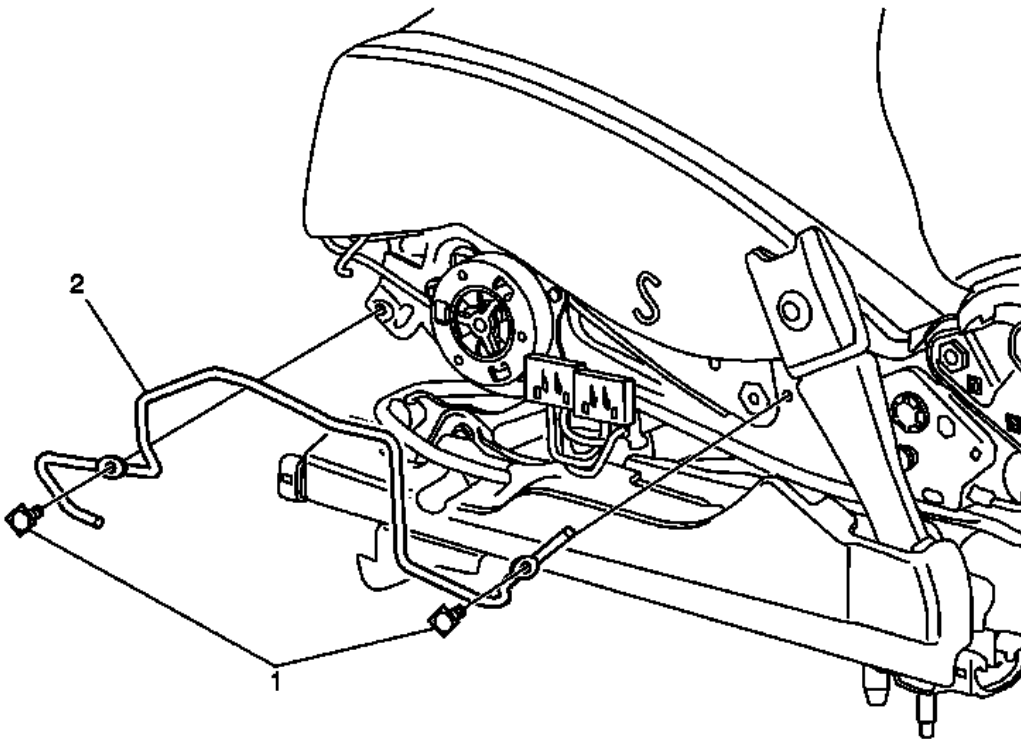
Driver or Passenger Seat Adjuster Finish Cover (8-Way Power)
